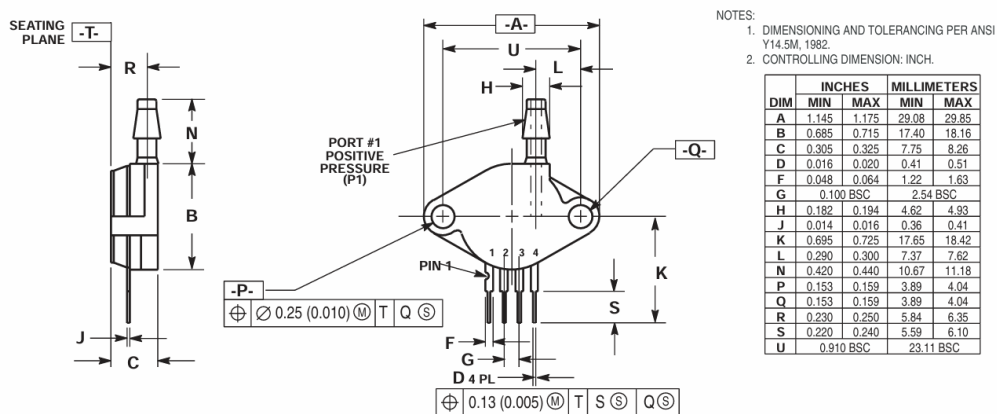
CASE 344F-01 ISSUE B UNIBODY PACKAGE
